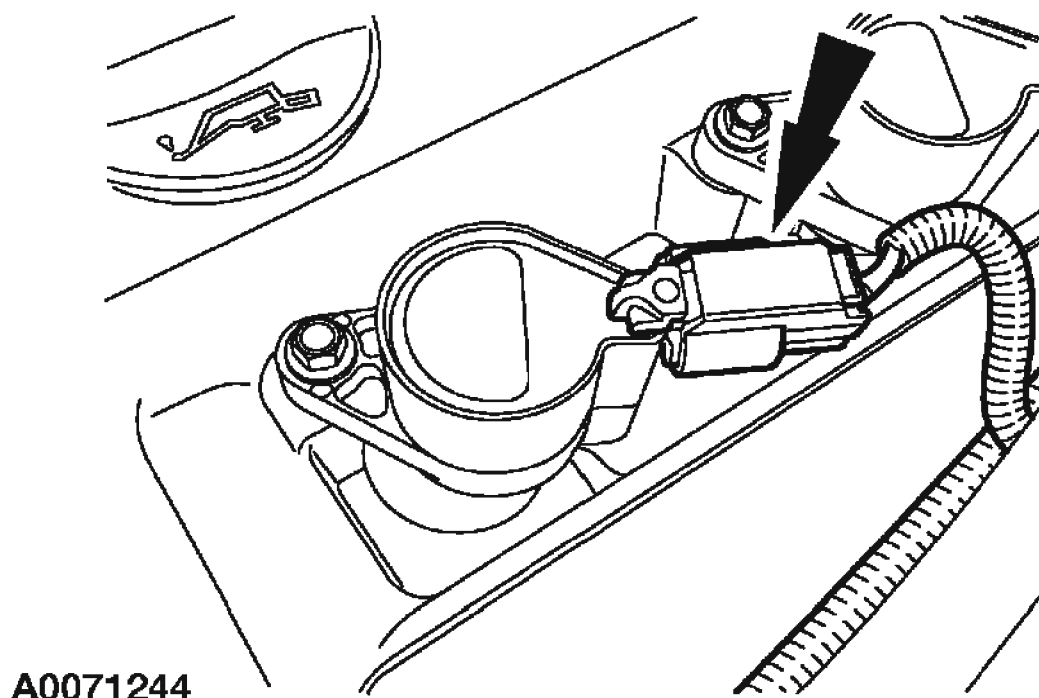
Disconnecting Ignition Coil Electrical Connector
